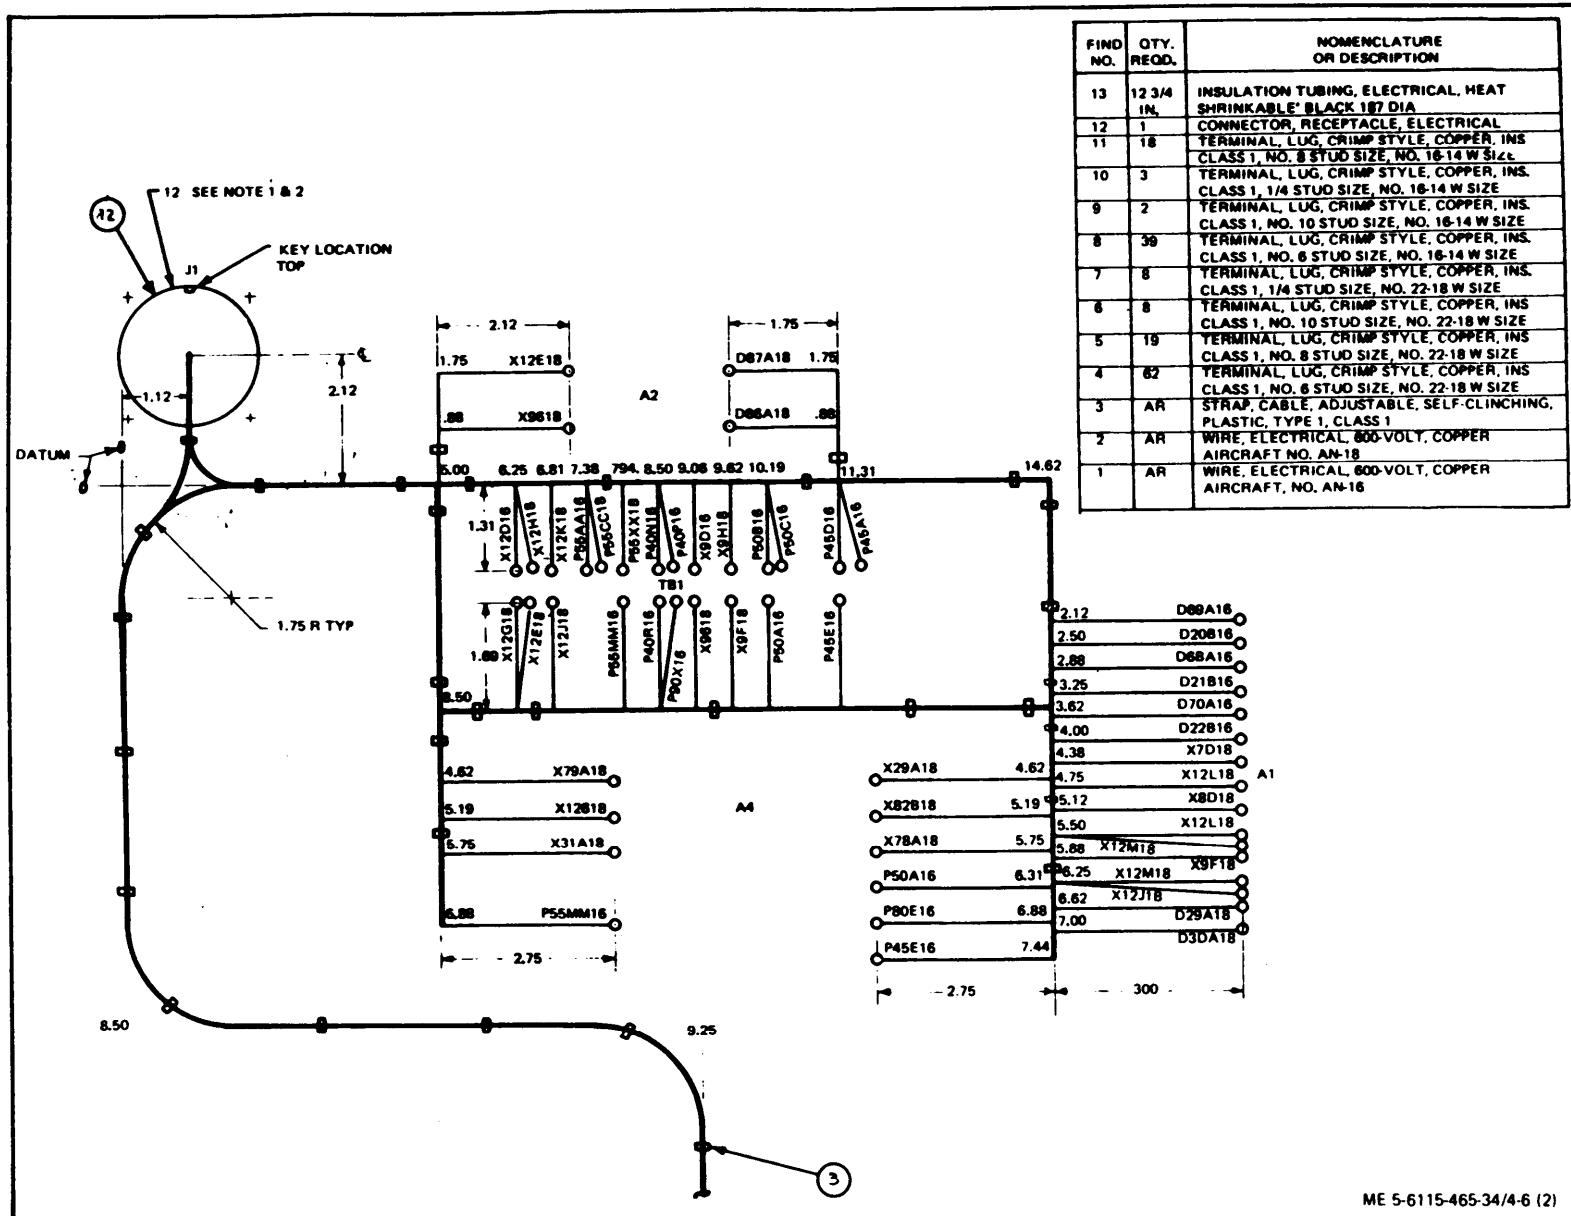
Control Cuticle Wiring Harness (Sheet 2 of 3) Drawing No. 69-677
